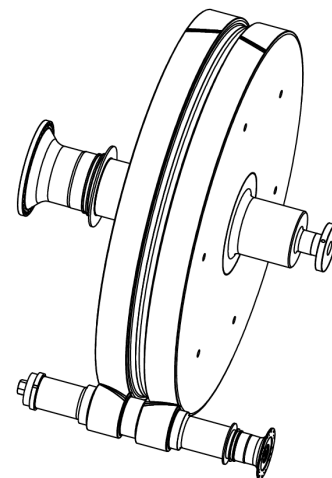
Gear-set drawing for gear ratio $\tau \approx 9$
